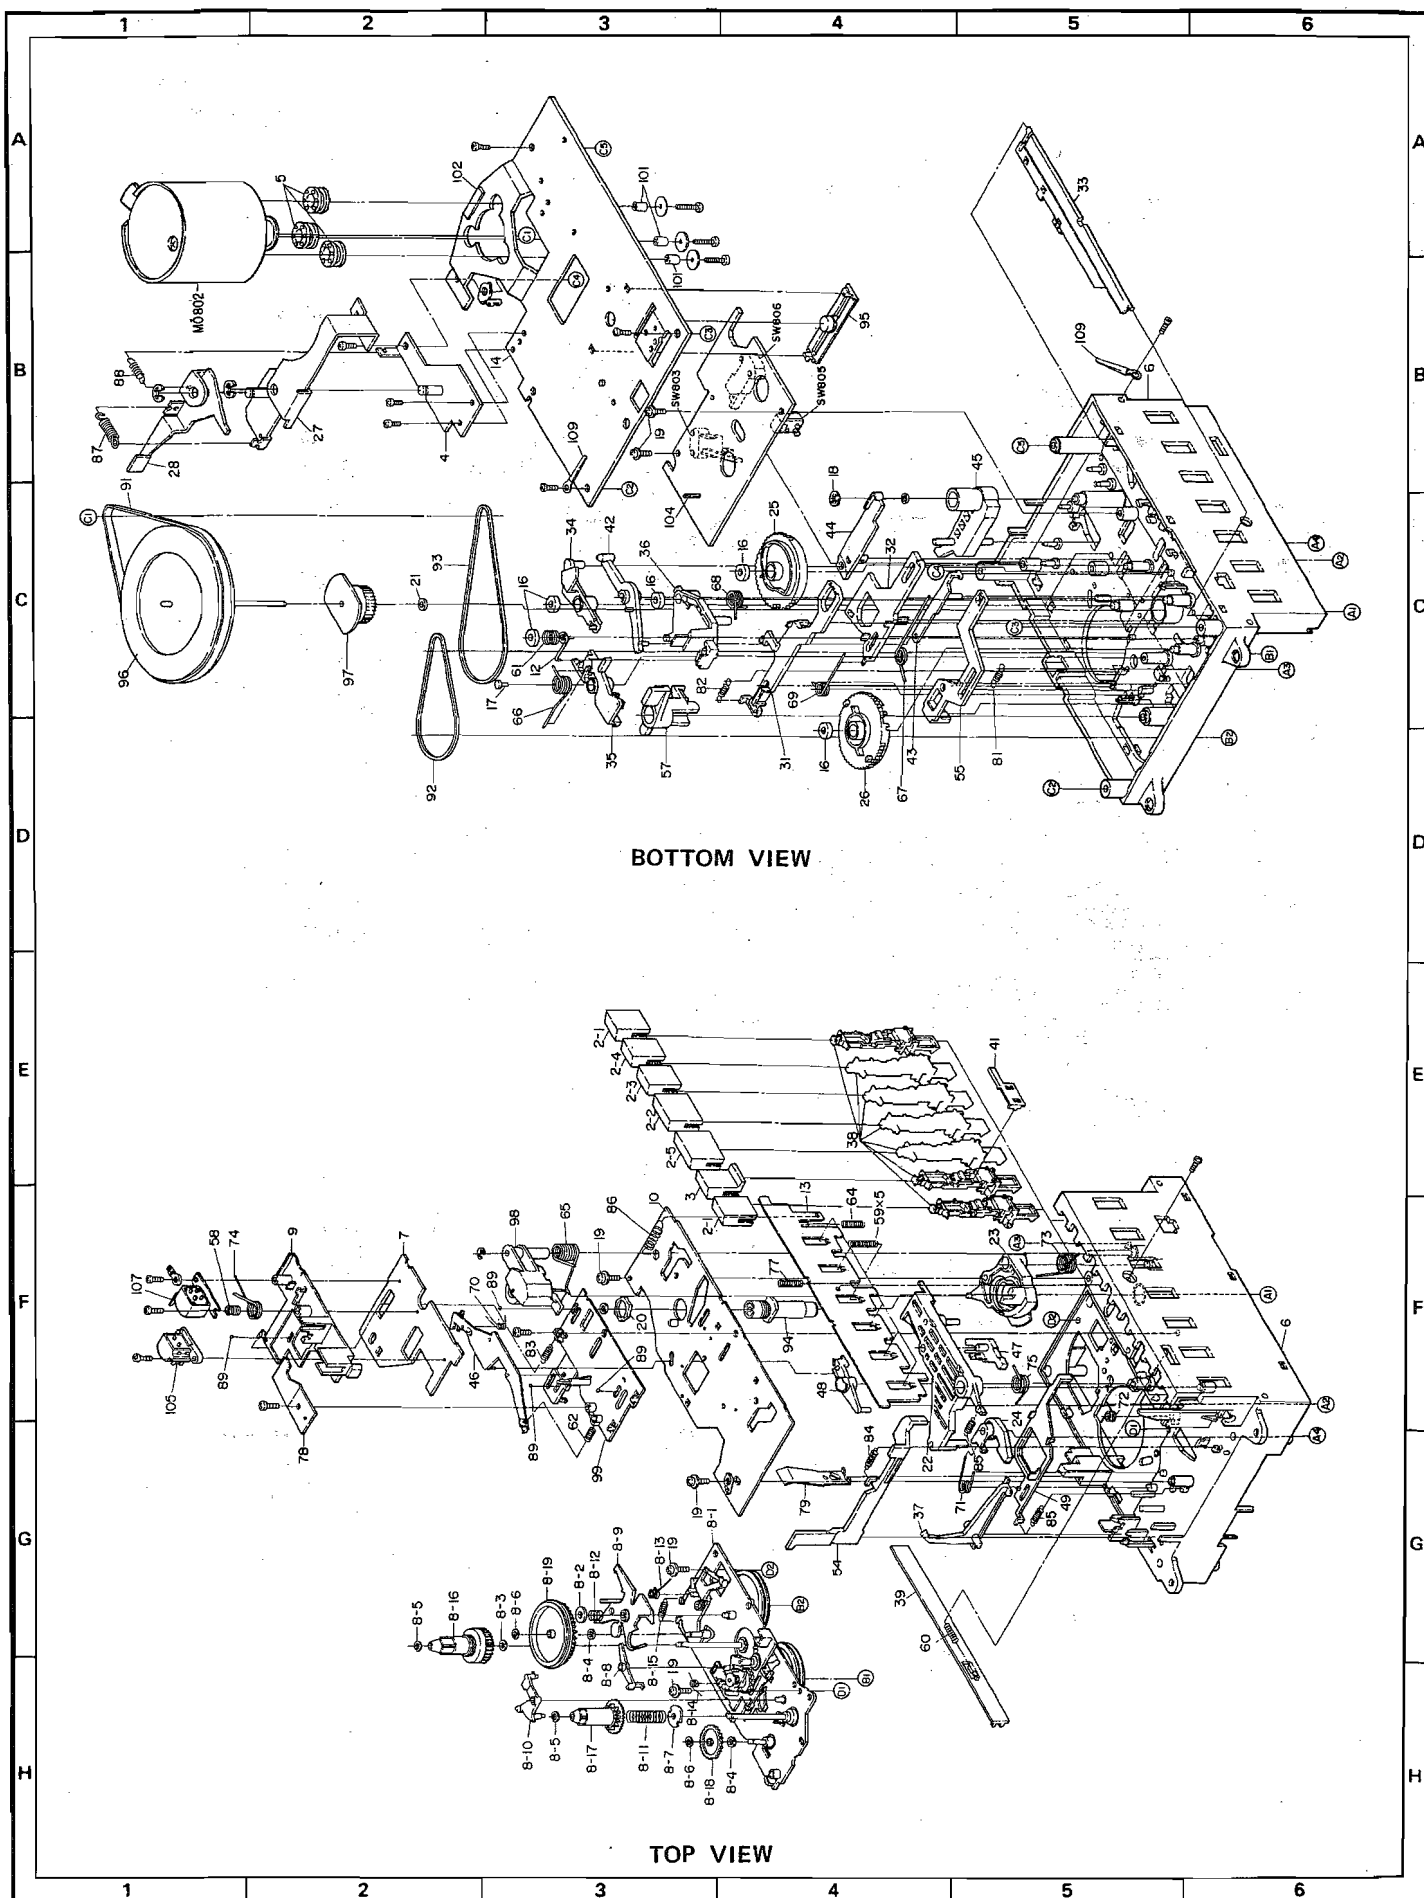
DECK 2 MECHANISM EXPLODED VIEW
